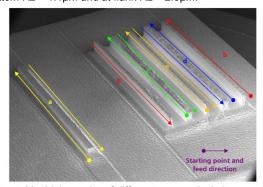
Machining order of different geometrical shapes with different cutting conditions using the air-driven spindle.
